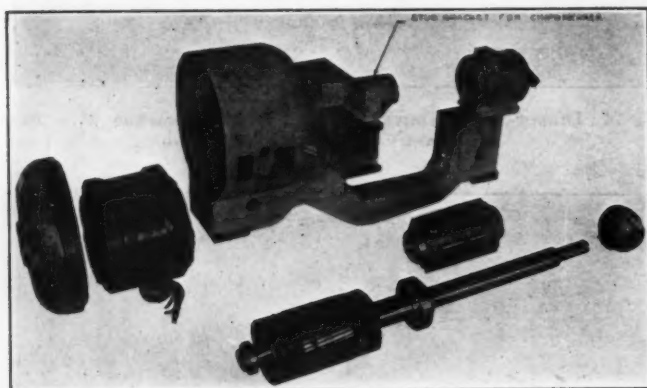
TOP-HEAD YOKE OF ELECTRIC MOLDER—MOTOR AND SPINDLE ASSEMBLY
